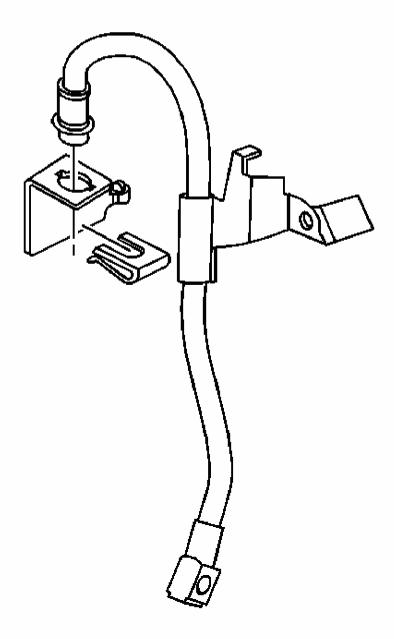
Removing/Installing Brake Hose Courtesy of GENERAL MOTORS CORP.
